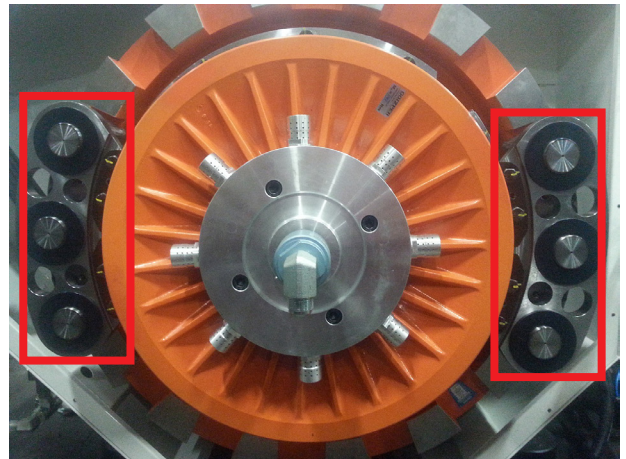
Front view of the flywheel and clutch assembly with screw locations
